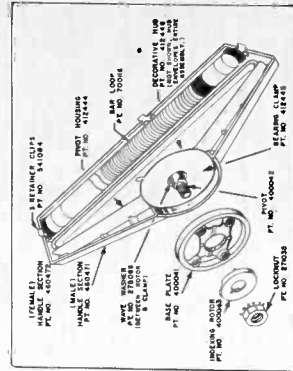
ROTATABLE HANDLE SHOWING COMPONENT PARTS
